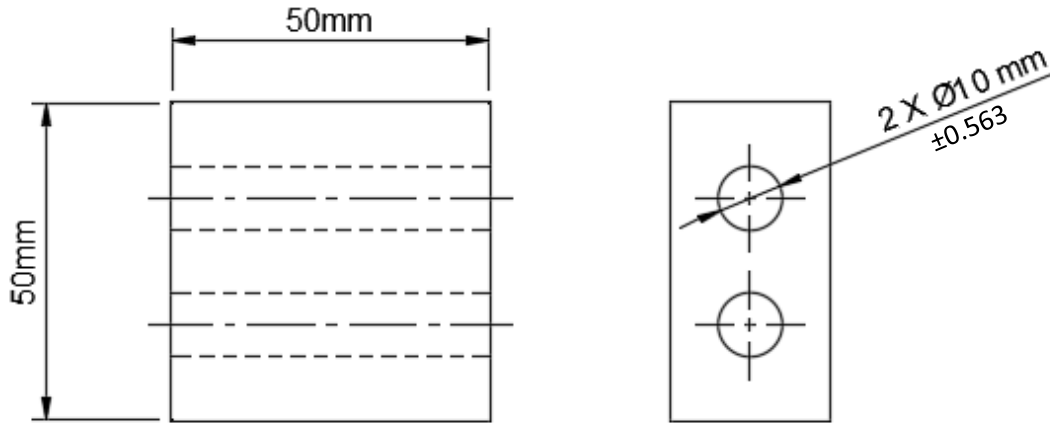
Front-view (left) and side-view (right) of test sample.
